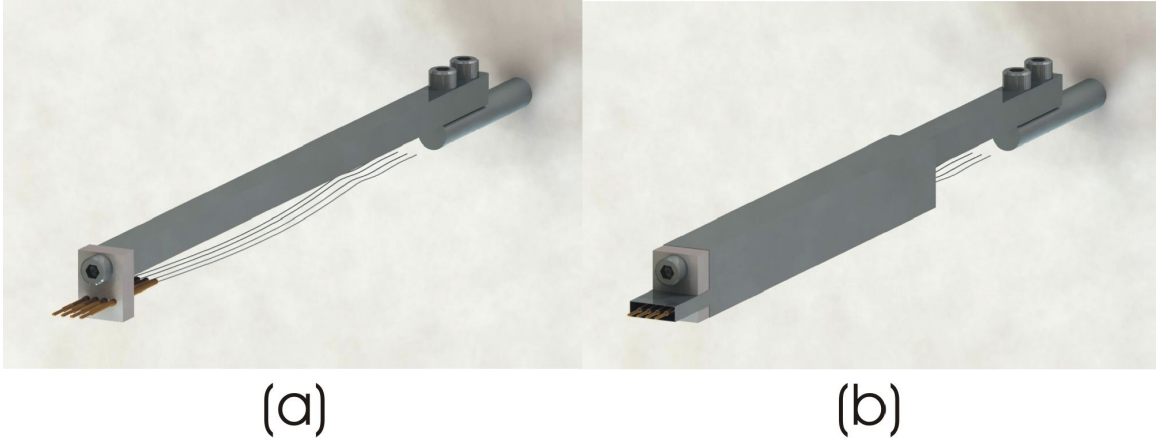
In fig.(a) the contact rod is shown without any shields. At the front, the four spring contacts are mounted in a line on a ceramic block. Fig.(b) shows the contact rod with shields to prevent any short-circuit between each contact due to the constant tungsten coating during the ion milling.
